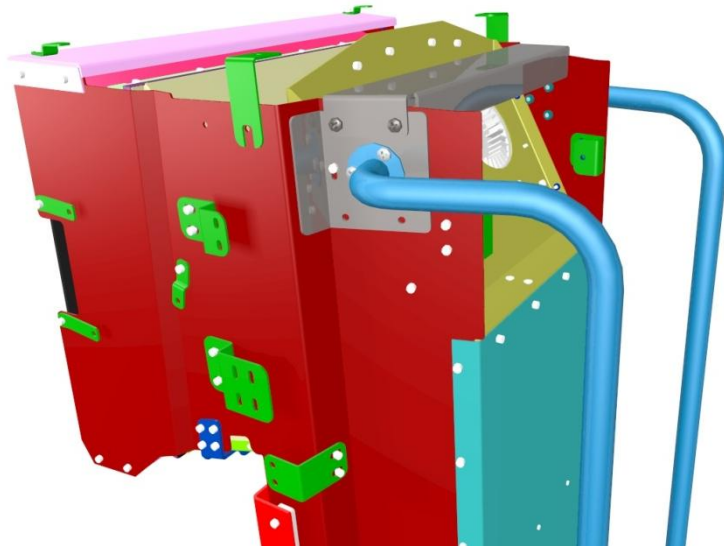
The handles are fastened to the 3mm thick reinforcement plates by M6 screws. The structure is strengthened by the cross beam that runs over the top of the workstation and is fastened to each reinforcement plate.
